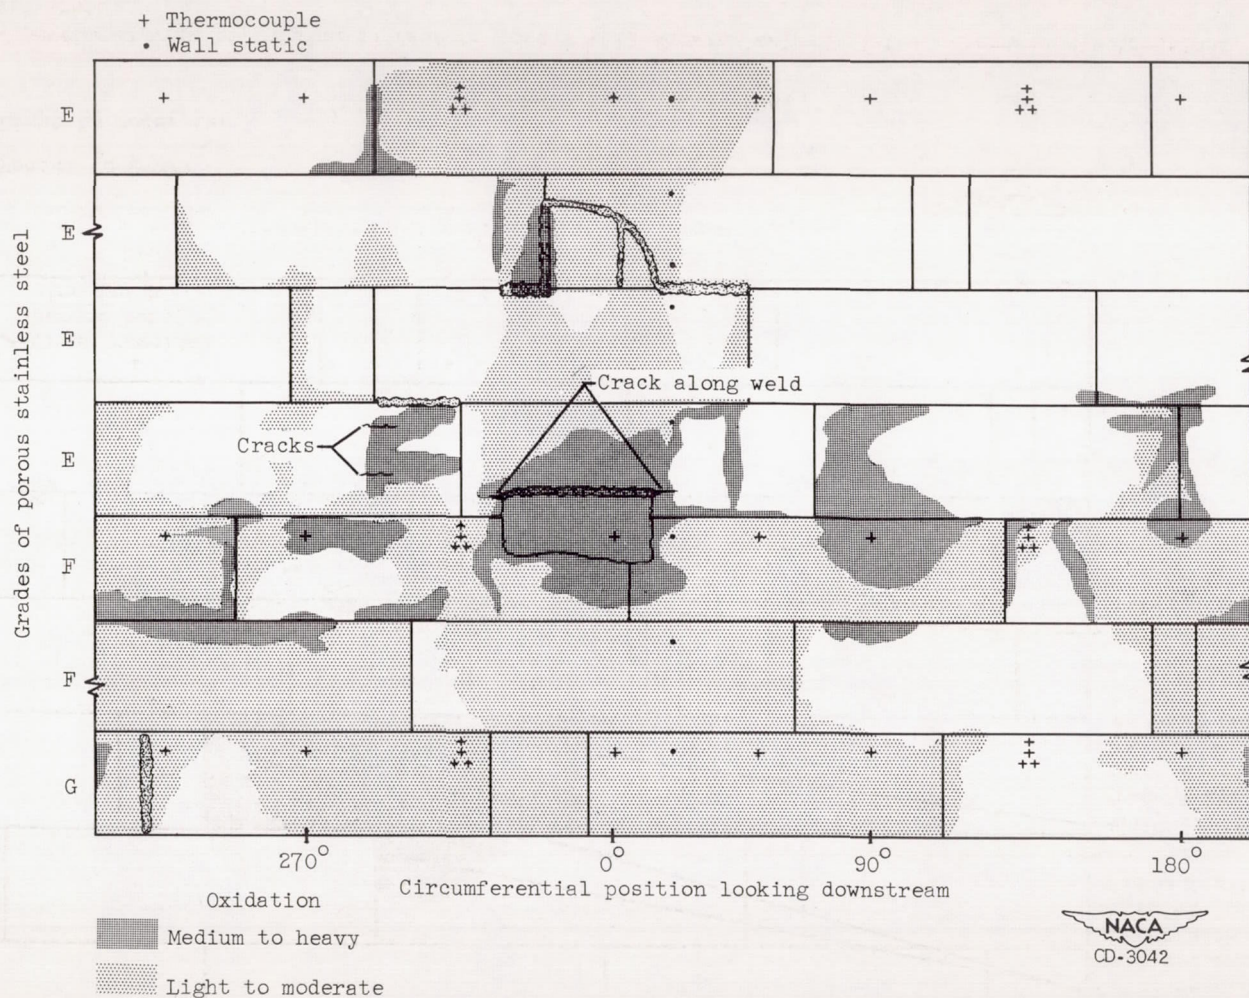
Developed view of outside surface of porous wall showing welded plates, thermocouple locations, and oxidized areas.
